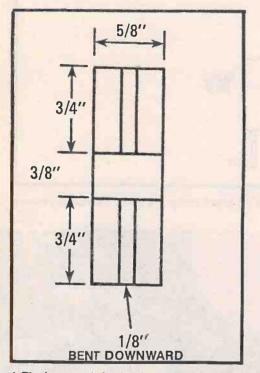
The homemade heat sink may be made from a small piece of copper or metal and formed with tin shears.
